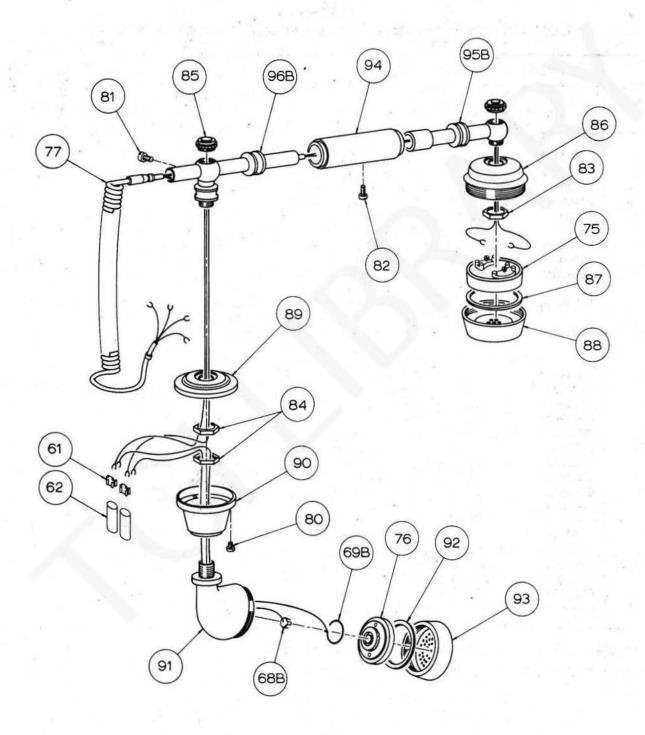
Cradlephone Handset - Assembly of Parts (Table J)
